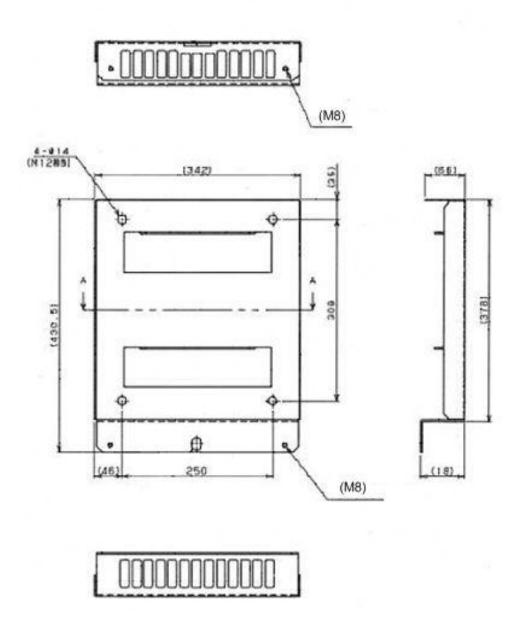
Wall Mounted MacroMAXe Wall Plate Details
